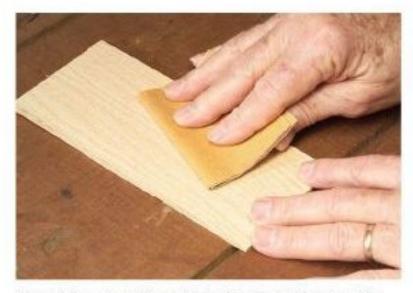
Be sure to sand the workpiece before applying the pattern. You may also want to sand the wood lightly once you have out the design and removed the pattern to eliminate any "fuzz" and to get rid of any glue residue.
